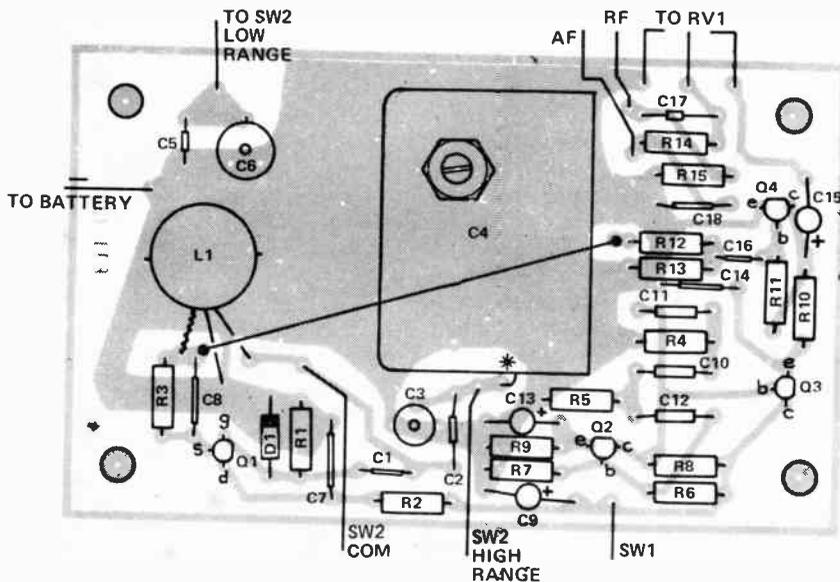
Component overlay for the RF generator. Note the wire link between R12 and C8 which should be installed before fitting C4. Also note the connection from C4 to the board where shown by the asterisk.
